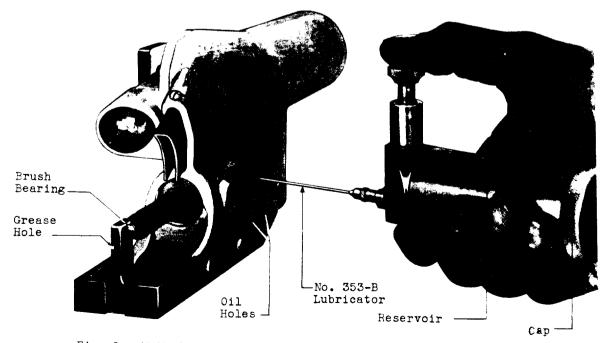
Method of Lubricating Vacuum Head with No. 353-B Lubricator
